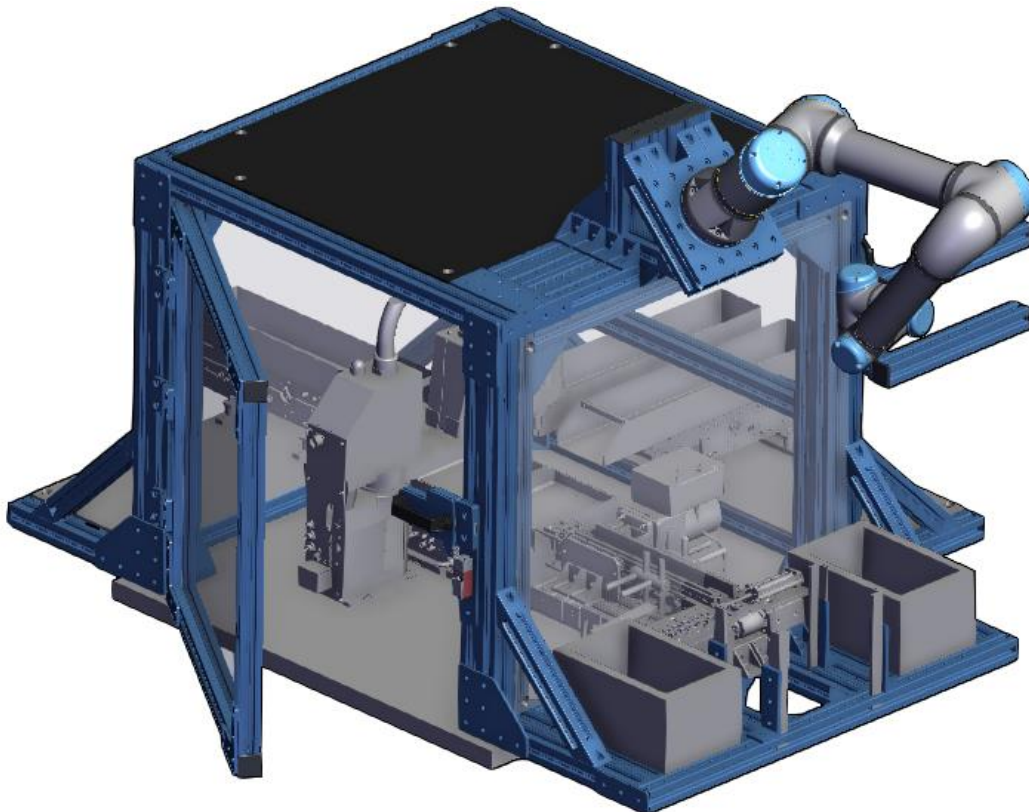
Automated Assembly Cell Safety Lock Door Designs
